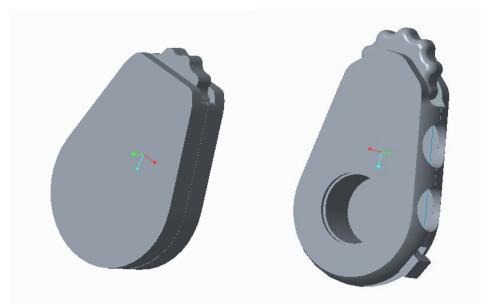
Original CAD Model (left) and CAD Model Used for testing (right)
